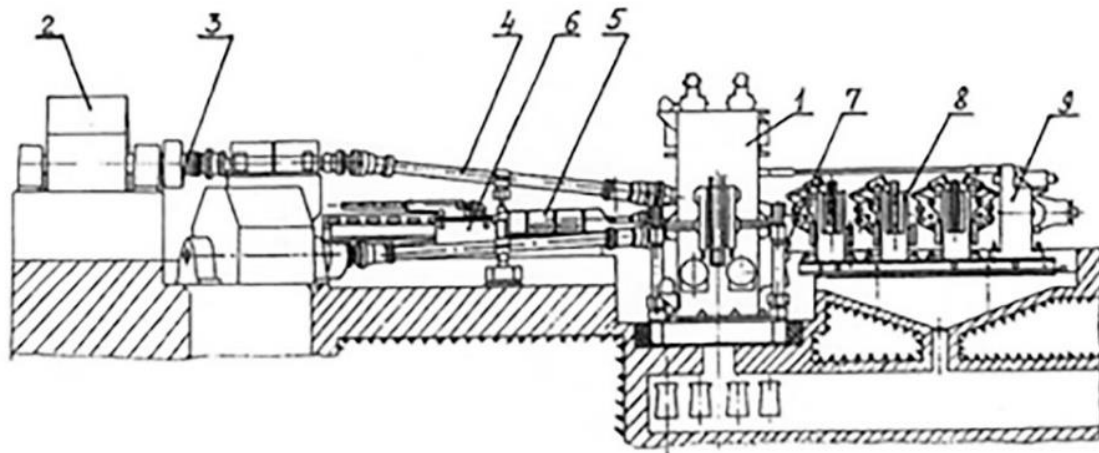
Scheme of a three-roll piercing mill [9]: 1 - piercing mill stand; 2 – drive electric motor; 3 – coupling; 4 – universal spindle; 5 – receiving chute; 6 – workpiece pusher ; 7 – idle rolls for running in the sleeve end; 8 – rod centering devices ; 9 - thrust -adjusting mechanism
